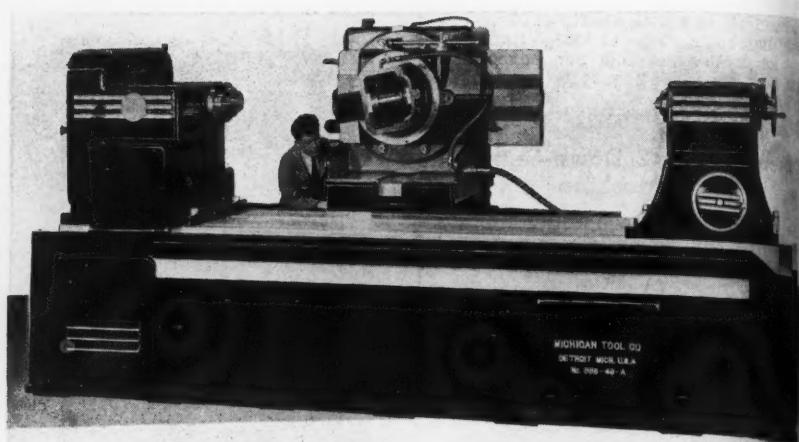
Michigan 865-48 Rotary Crossed-Axis Gear Finishing Machine
